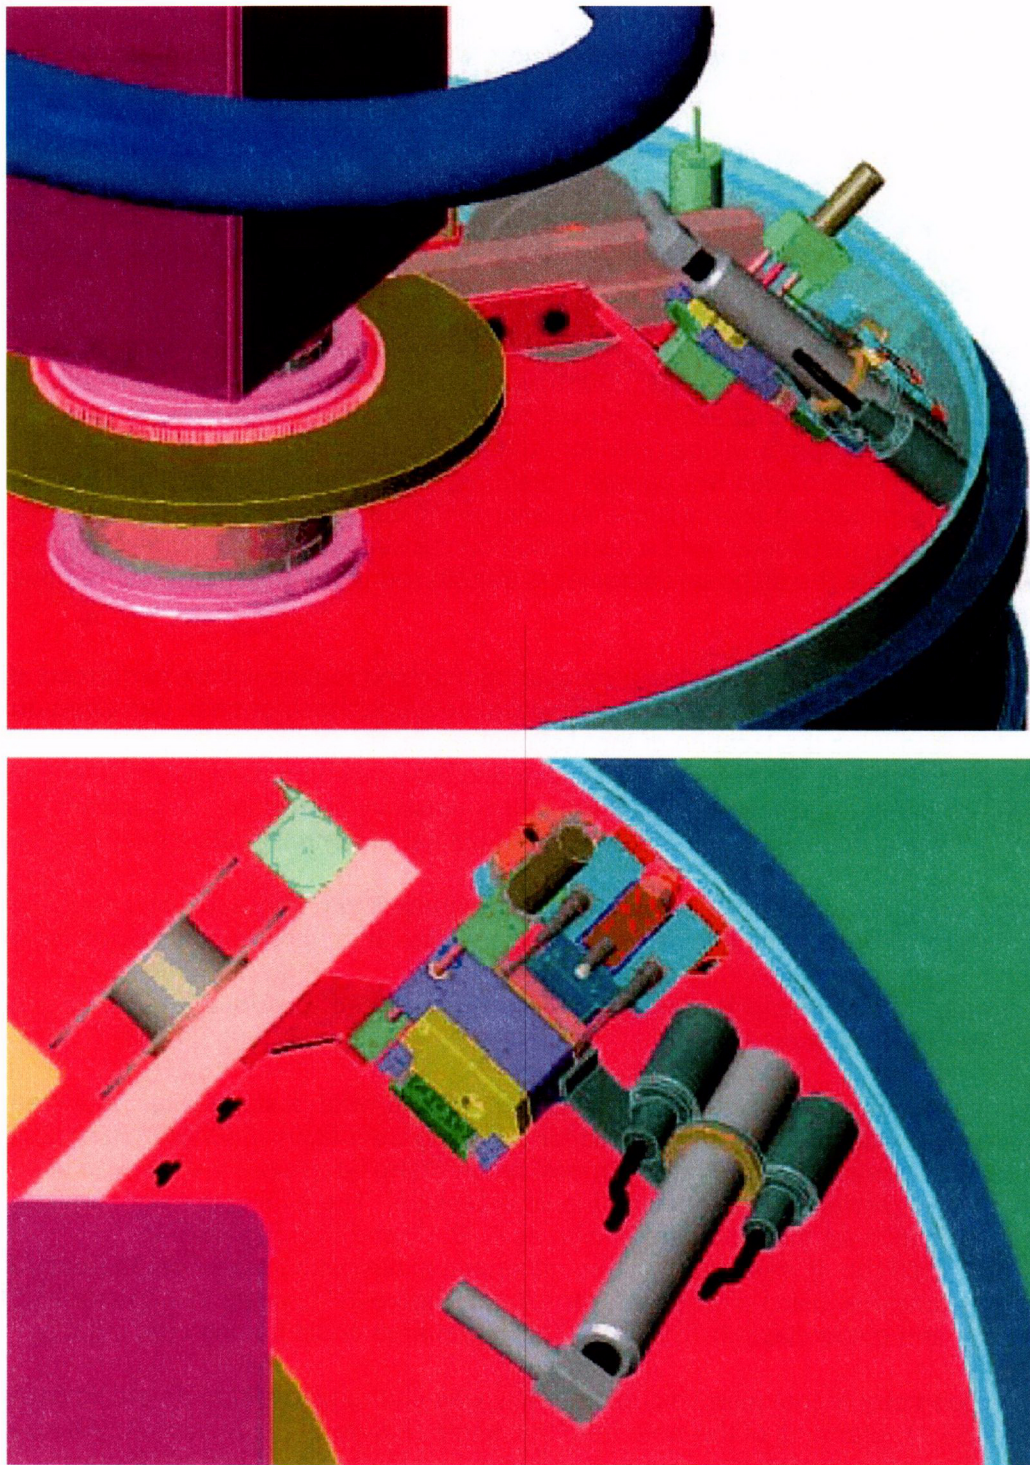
Flat Closure Lid Fixture (CRWMS M&O, 2001b)
